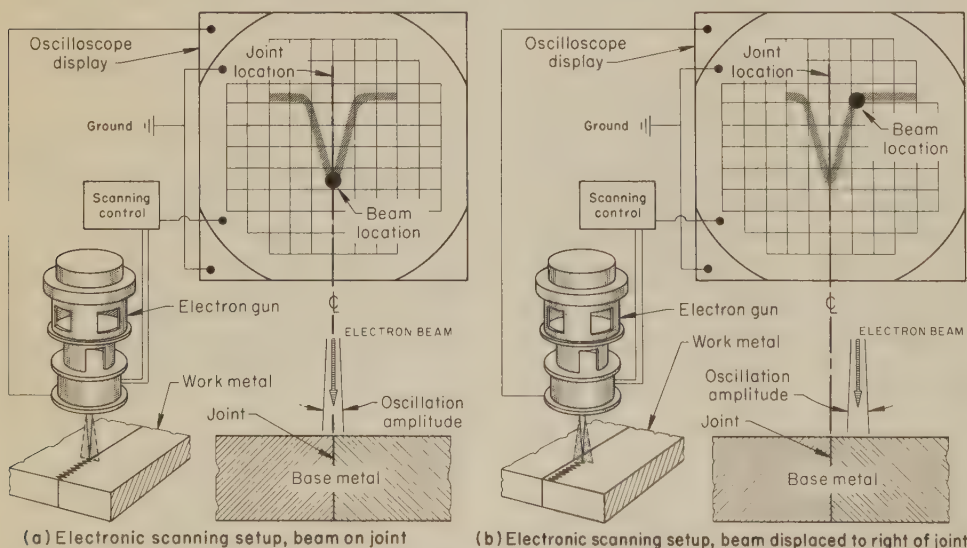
Arrangement for electronic scanning of a joint, showing equipment, joint to be welded, and oscilloscope display (a) with the beam centered on the joint and (b) with the beam displaced to the right of the joint
